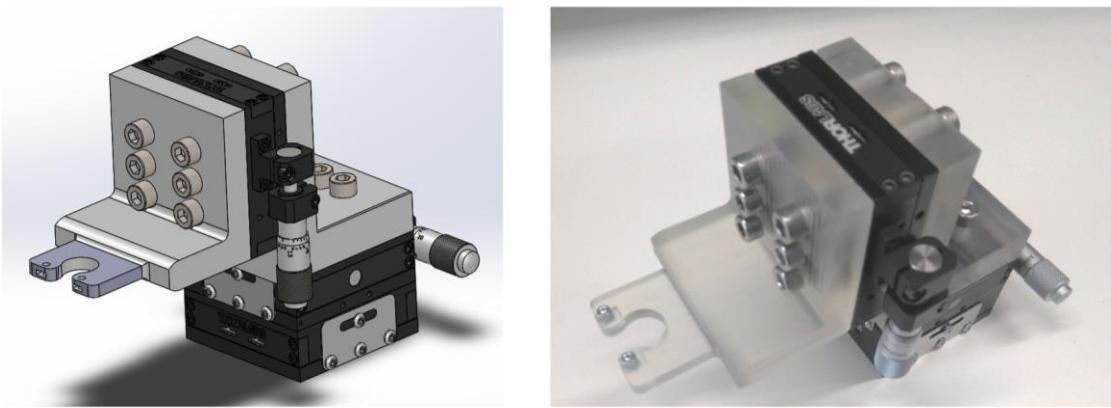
Virtual assembly of the head post designed using Solidworks ® software (left) and real assembly (right).
